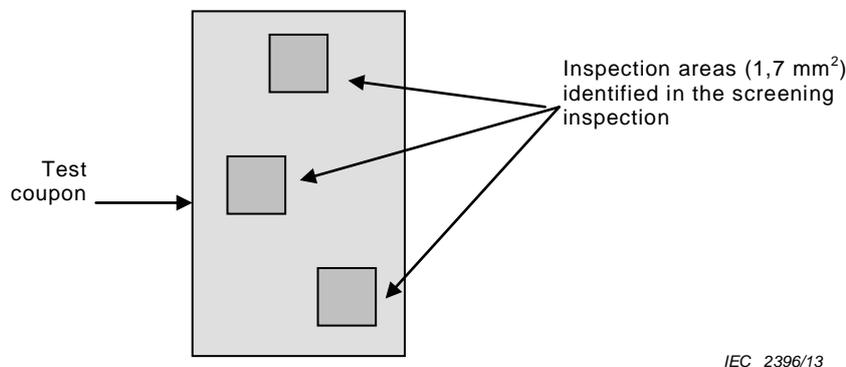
A schematic drawing depicting one possible coupon and three 1,7 mm² areas identified for inspection
